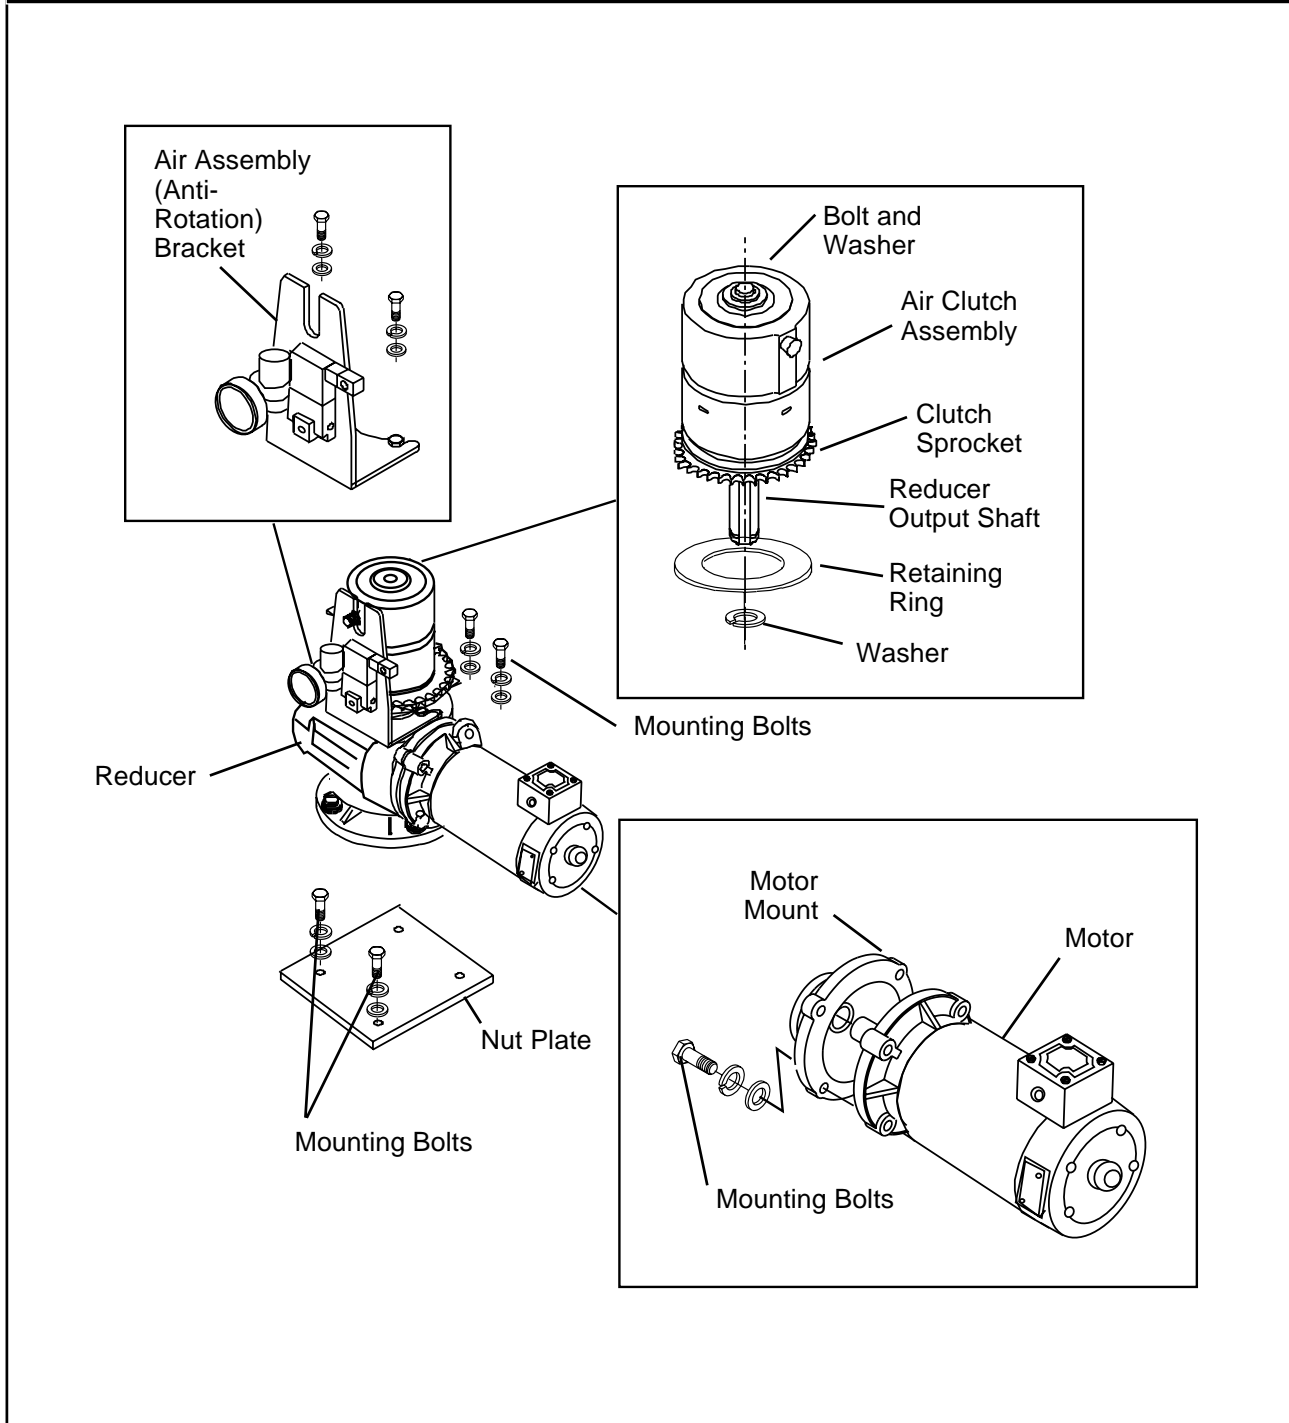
FS-40/50-RD Feeder Air Clutch & Motor Assembly Exploded View
